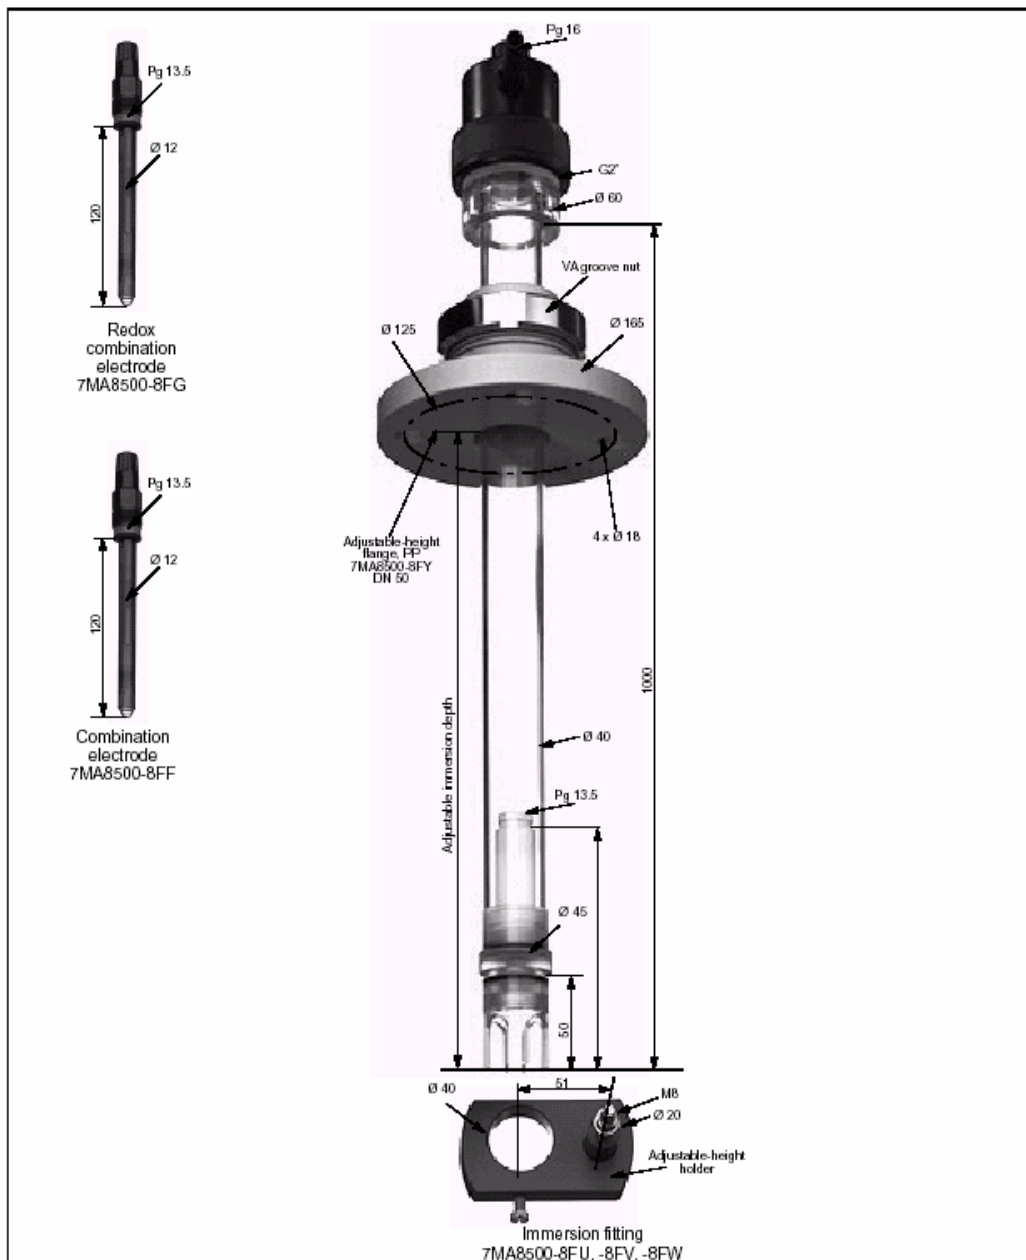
/27 Sensors for pH and ORP measurements in tanks or open vessels, dimensions in mm
